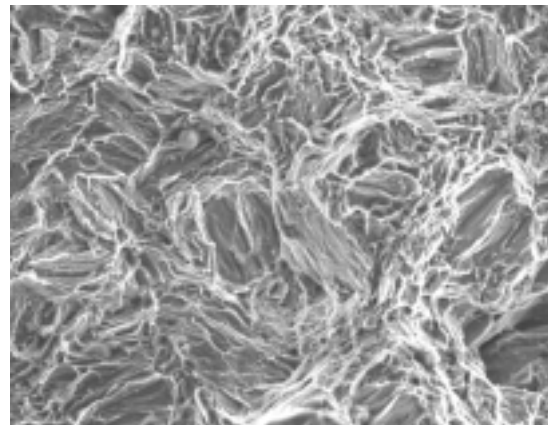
SEM of tensile fractured surface of Mg-alloy extruded rod showing ductile fracture
